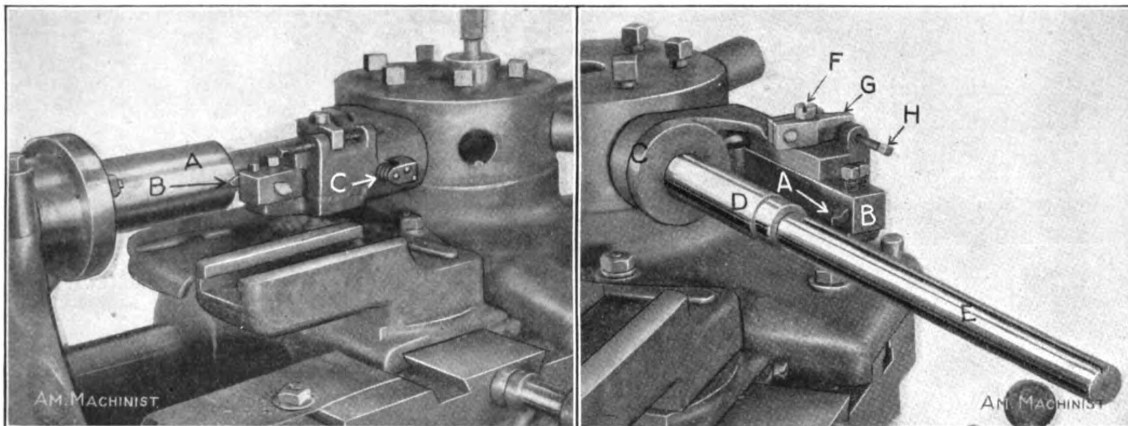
TURRET LATHE FITTED FOR TURNING PISTON RINGS
